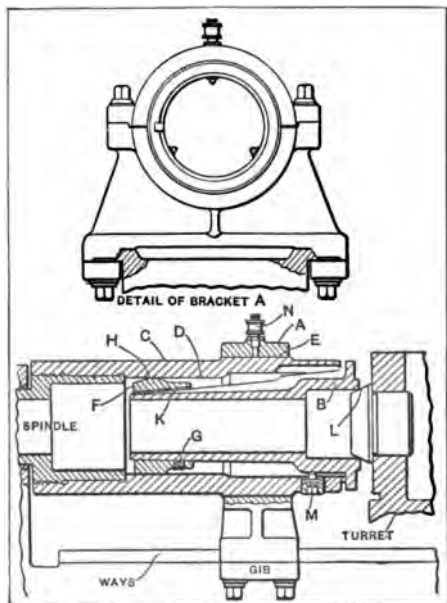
Fixture for Holding a Long Part—Outer End is supported by Bracket
